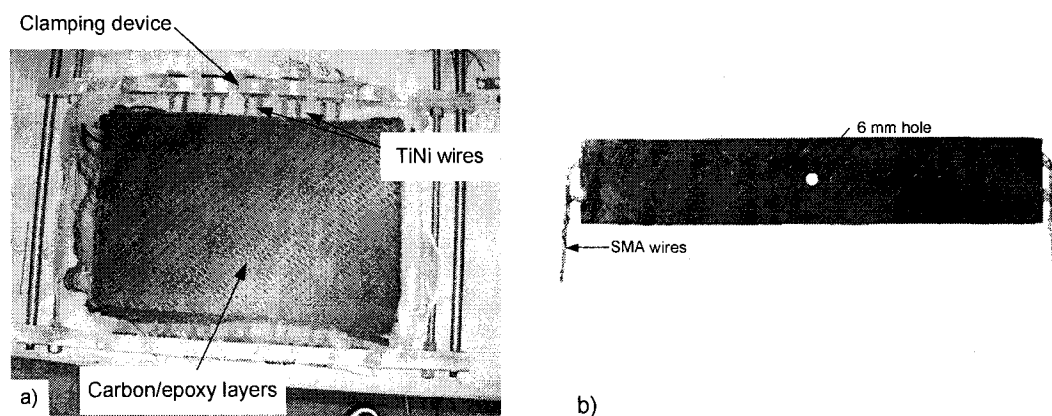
a) Laminate after curing process with the clamping device for TiNi wires; b) final specimen
